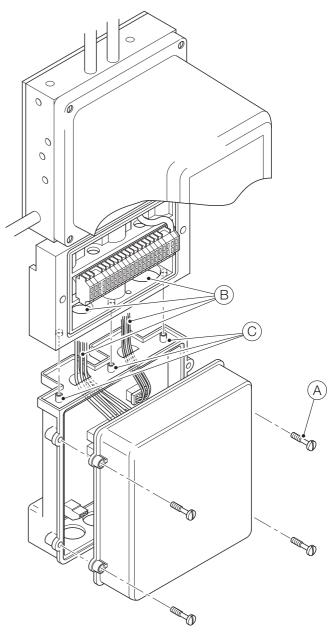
Locating the smart electronics assembly (AZ400-046)
